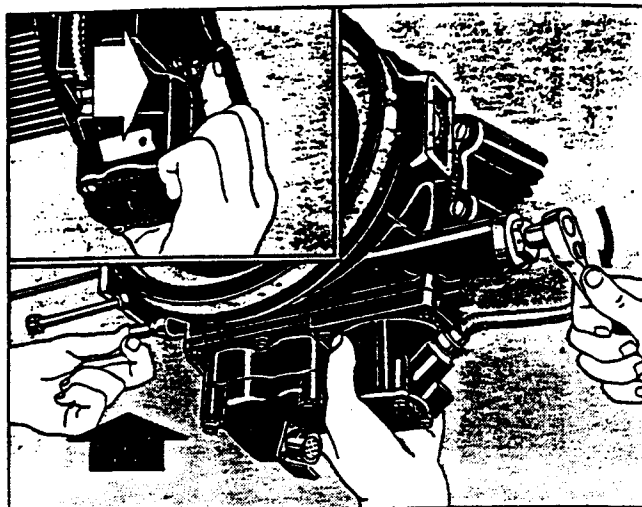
Tightening Spring Compression Bolt and Depressing Calibration Pin
